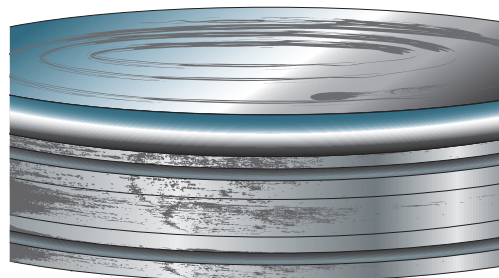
Bearing cups should be tight in the wheel boss and should never rotate. The outside of a bearing cup that was spinning while installed in the wheel is shown.
